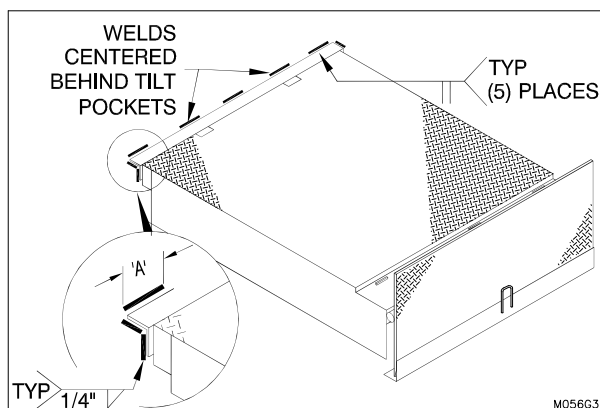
Hydraulic Dock Roll-Off Stop Back Angle Weld of Dock Leveler
